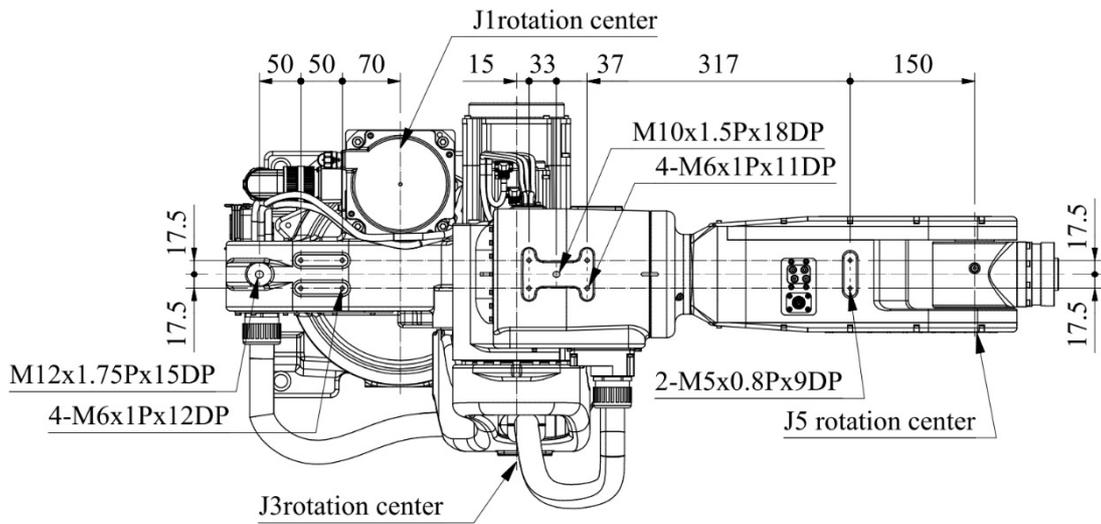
(b) RA610-1355-GA Mounting surfaces on the robot
